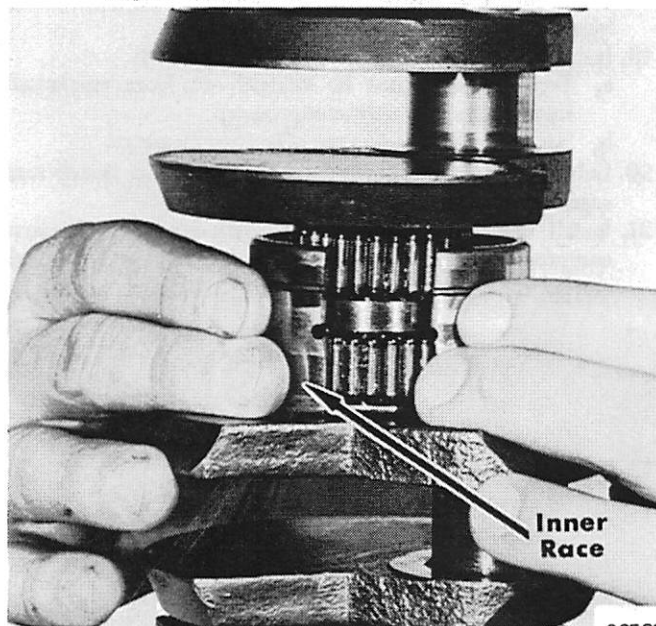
Removing and Installing Center Main Roller Bearings and Outer Race
